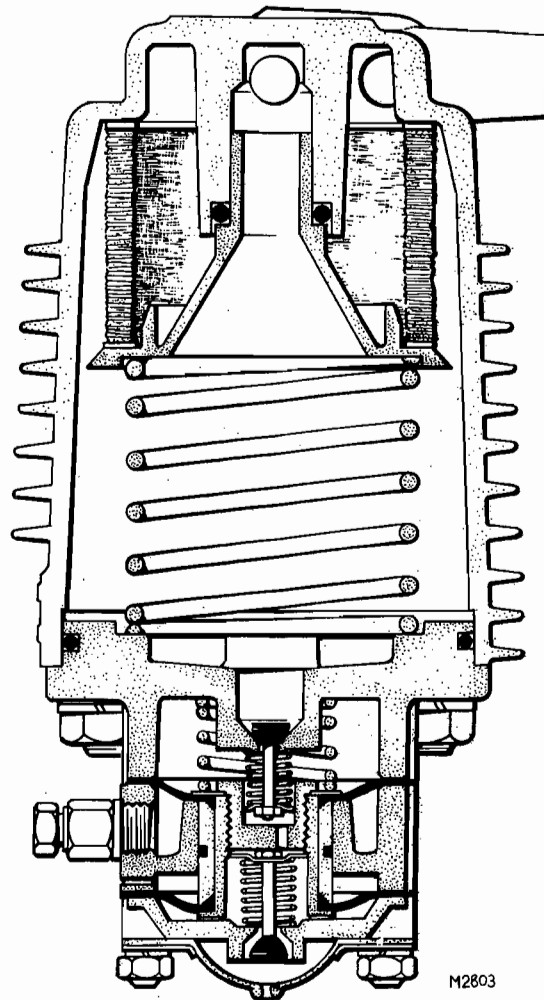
SECTION VIEW OF CONDENSER AND DRAIN VALVE
